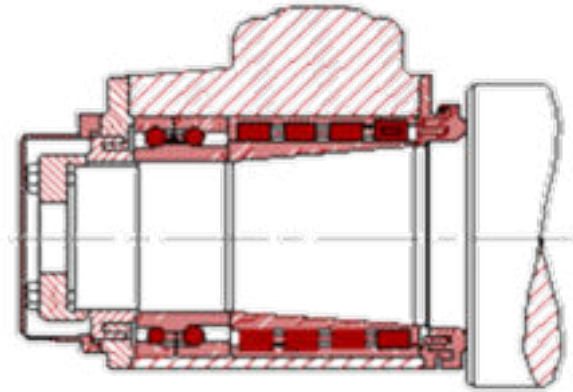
Parallel roller for radial load and angular contact ball bearing for thrust
